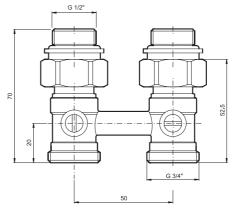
Dimensions Verafix-VKE straight with flat seal and double nippel
